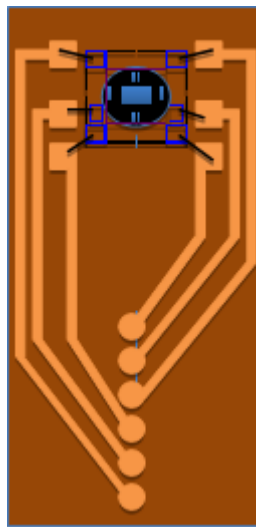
PCB Layout with Sensor and Wire Bonds
